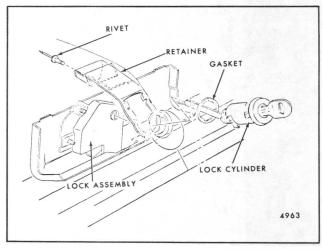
Typical Top Loading Lock Cylinder Retainer -Chevrolet "A" Style Shown
